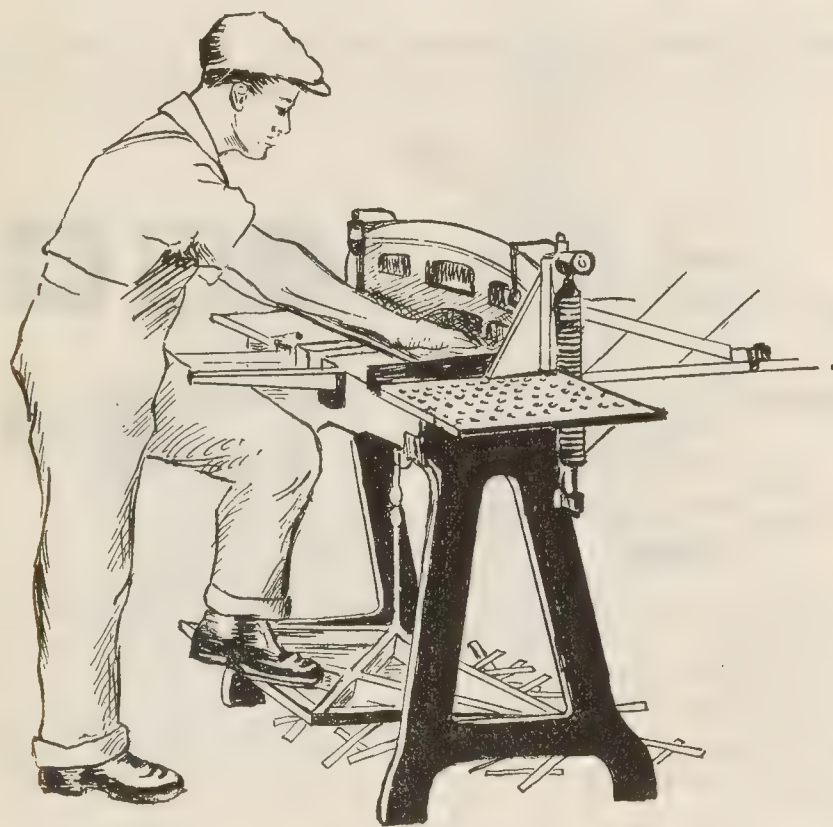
,764.—Squaring shears. They are used for trimming and squaring sheet iron. *In selection*, decide on the length of shears that will answer all requirements and the heaviest sheet metal that will be cut. Then select the type of shears best suited for the requirements.
